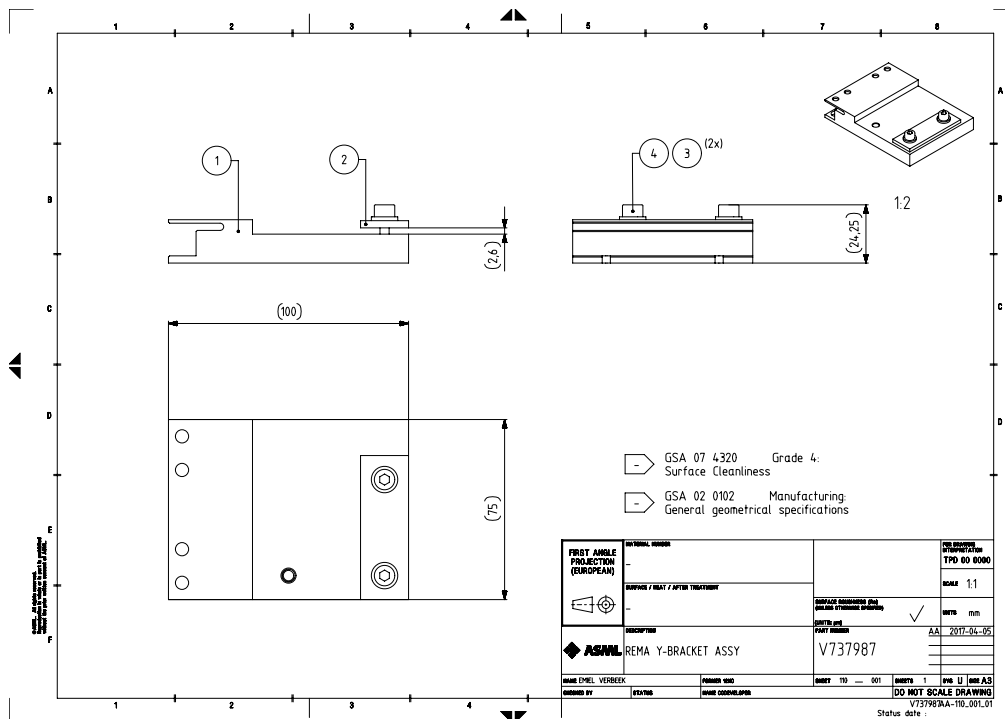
Bracket attached to the rema test-rig for clamping the blade.
